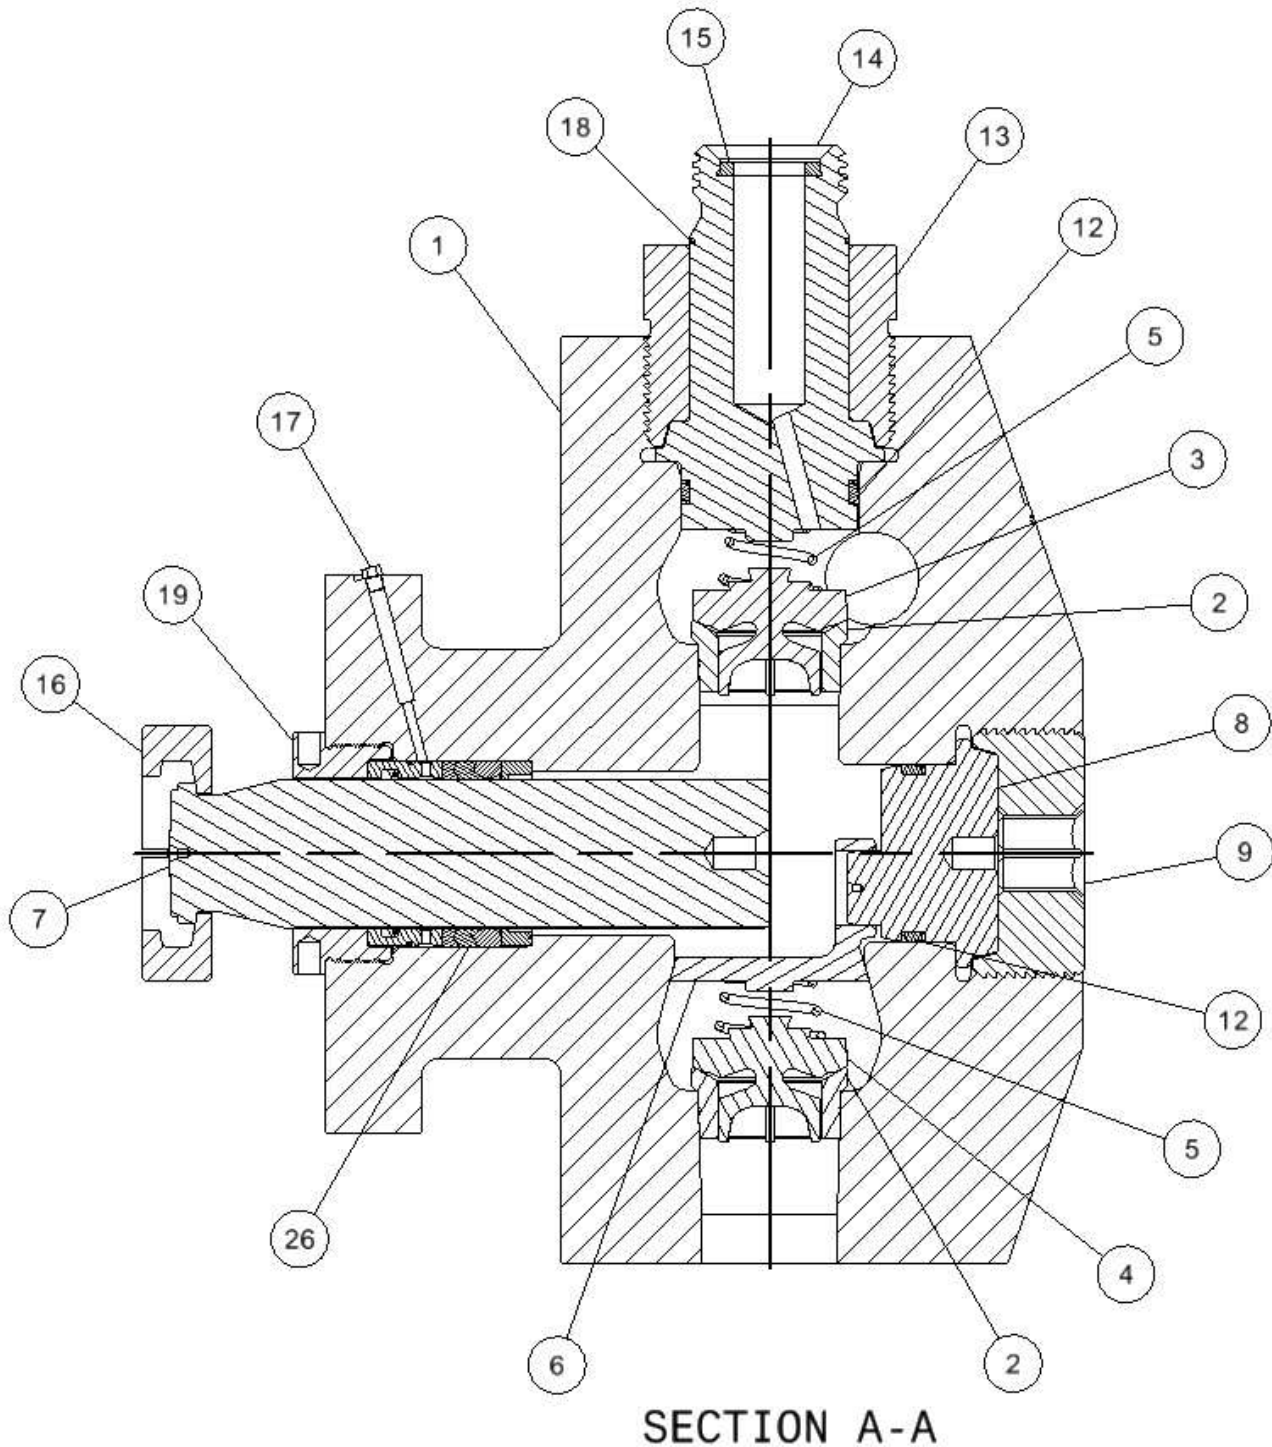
SUPER GWS FLUID CYLINDER SECTION A-A VIEW
